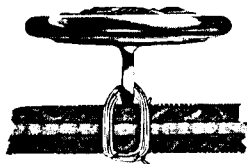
BUTTON SEWN ON BY MACHINE 58-14 WITH VISIBLE STITCHES
